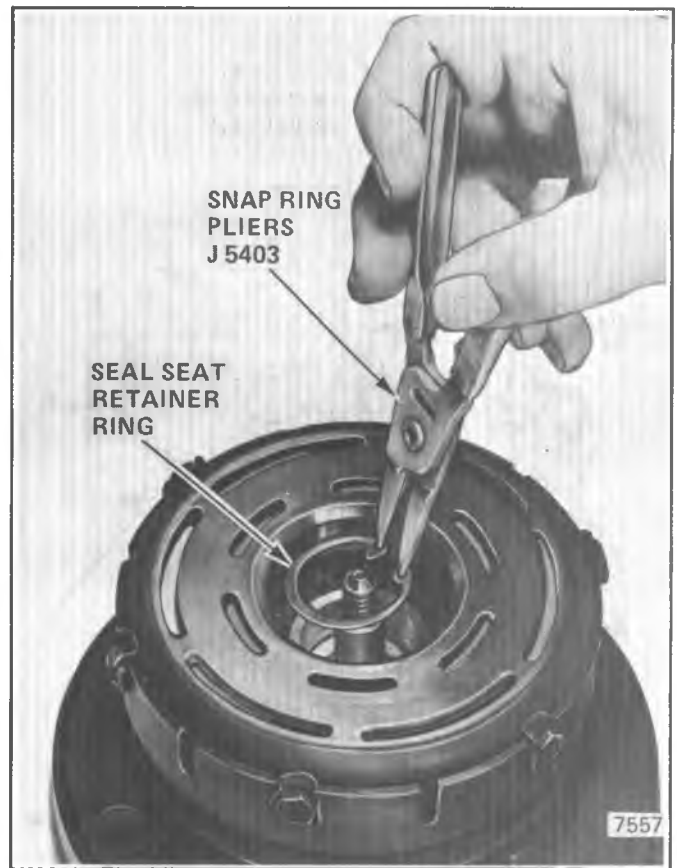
D-90 Removing or Installing R-4 Shaft Seal Seat Retaining Ring
